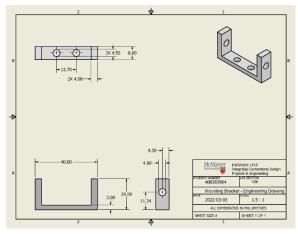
Fully dimension engineering drawing of the Top Mounting Bracket
